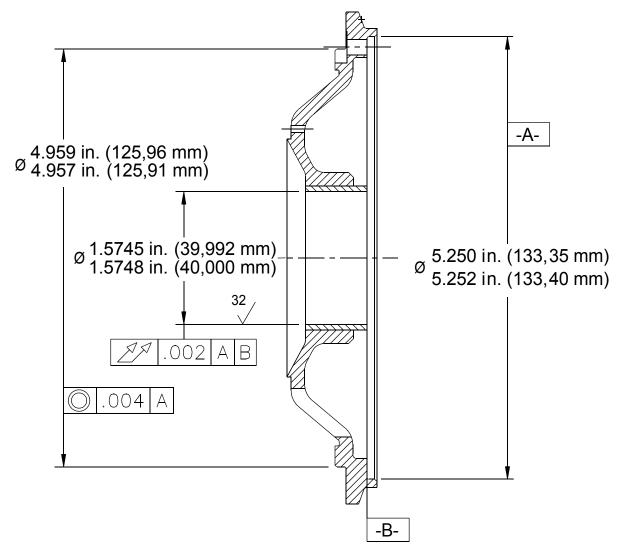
Drive End End Bell Bearing Liner Machining Specifications (IPL 10003, P/N 23081-1130/-1131, 23032-3652, 23081-1230)
